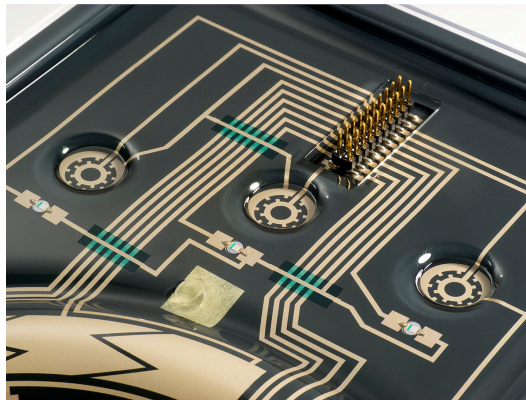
Example of in-mould electronic by DuPont, TactoTek <https://www.designnews.com/thermoforming/duPont-tactotek-ratchet-mold-electronics-efforts/176641071057057>
